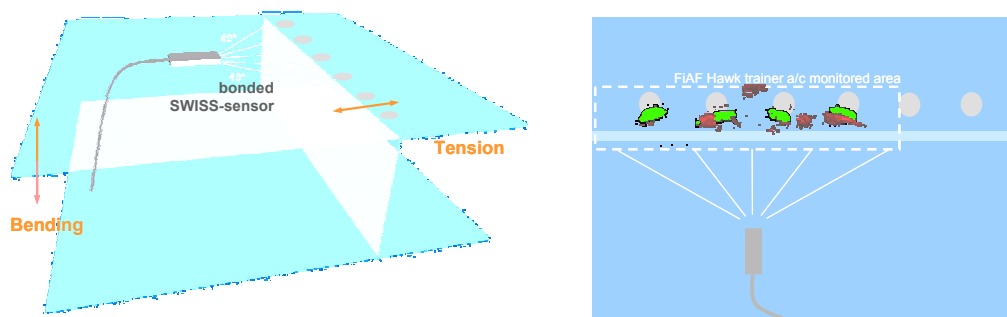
Left: surface mounted SWISS sensor (piezo-array) monitors riveted metal skin in hidden, inaccessible area for bending or tension cracks. Right: US image shows (green) natural rivet hole echoes proving system is working and (red) fatigue crack echoes.
